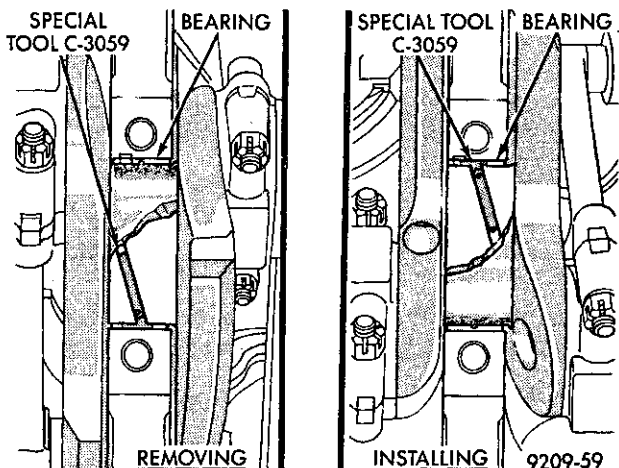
Upper Main Bearing Removal and Installation with Tool C-3059
